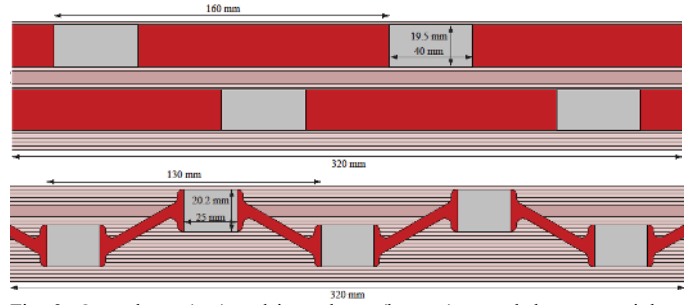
Outer layer (top) and inner layer (bottom) quench heaters: stainless steel heating stations (gray), and copper plated parts (red).
